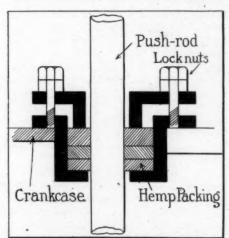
Valve rod stuffing box to prevent leakage of oil from crankcase.
